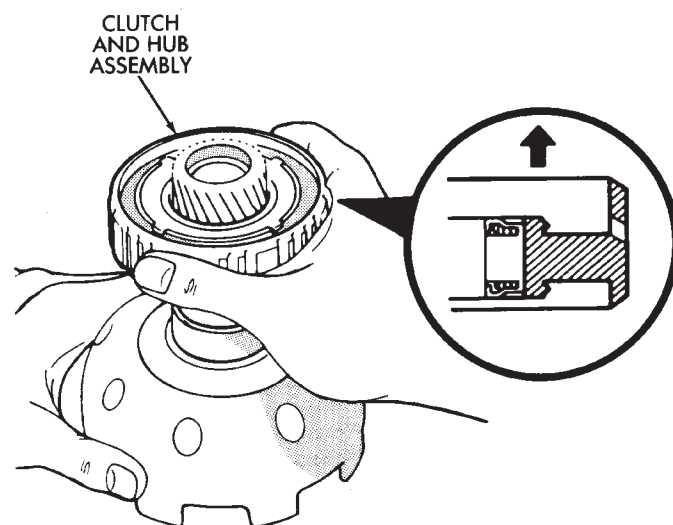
Installing Clutch And Hub Assembly On Sun Gear
